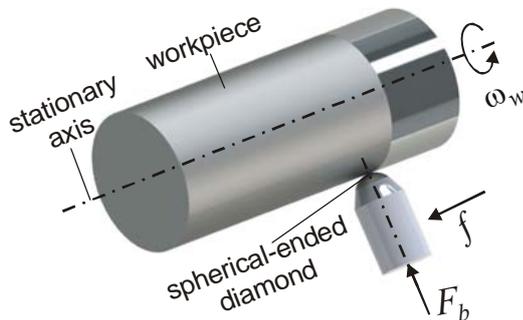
Scheme of slide burnishing with spherical-ended tool
